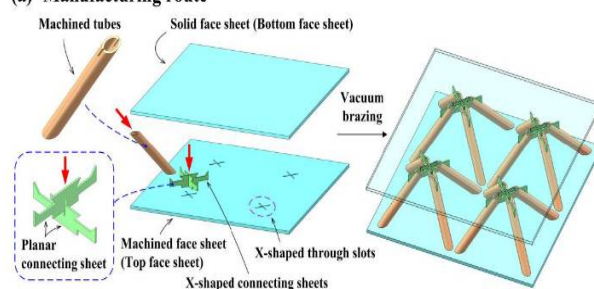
Mechanical interlocking of tubes on plates using fixtures cut in a proper geometry [9]
